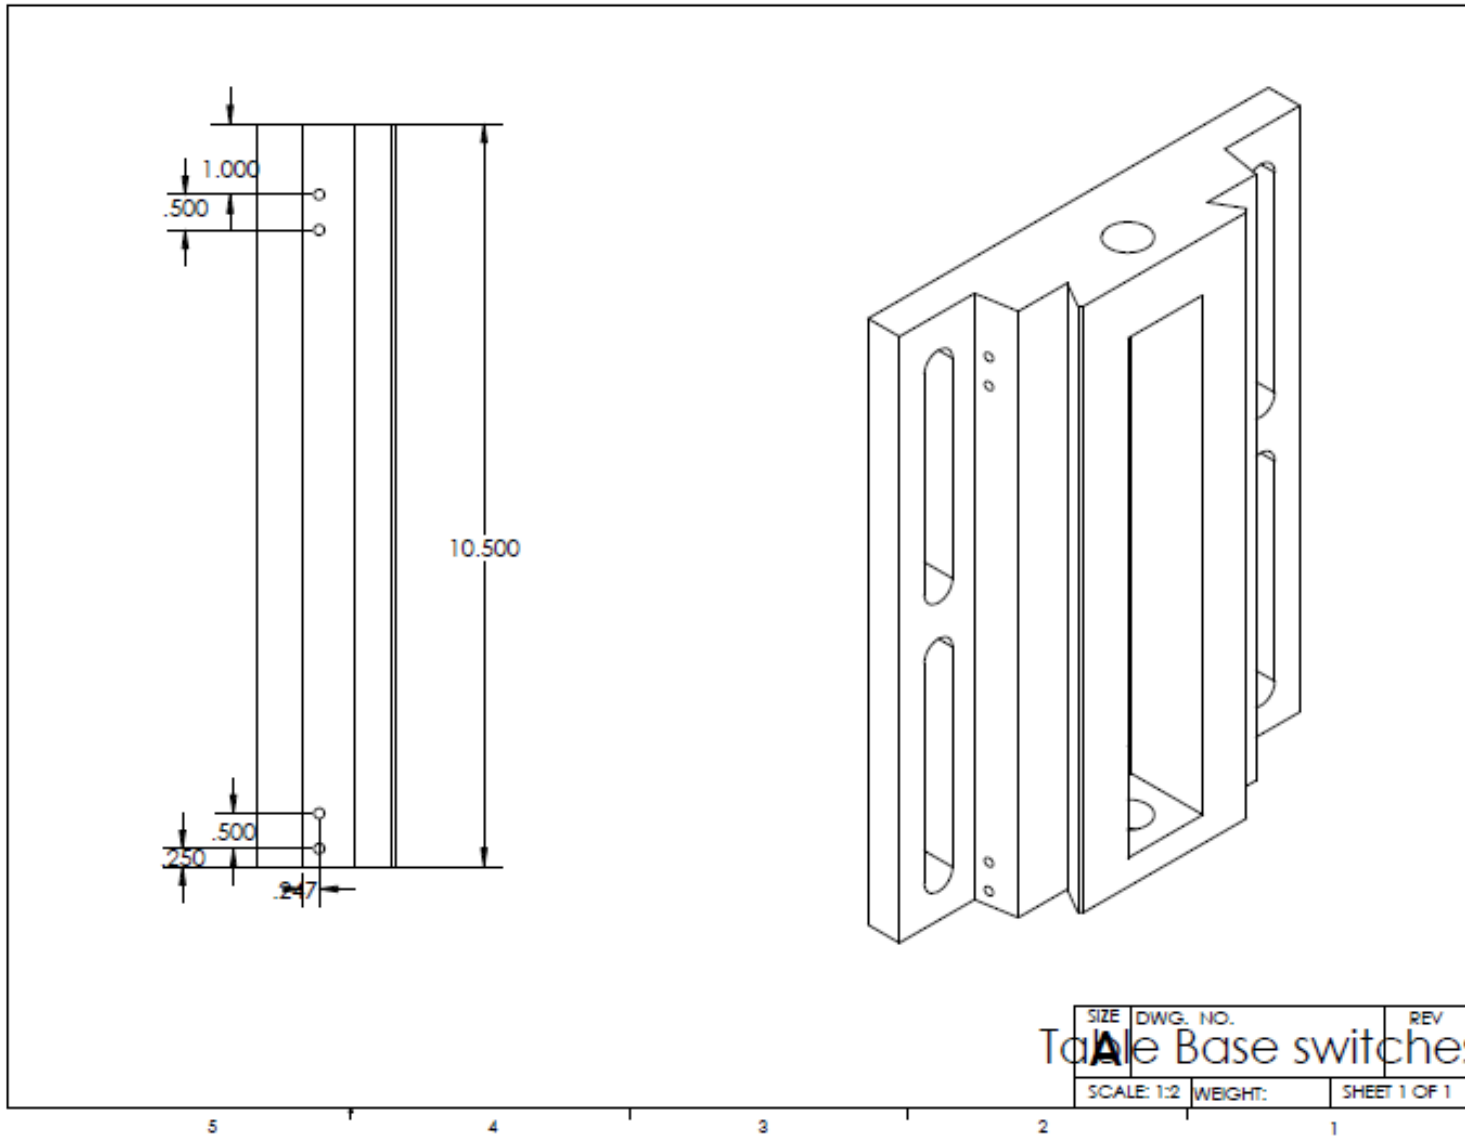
Engineering drawing of the revisions needed on the table base for limit switches
